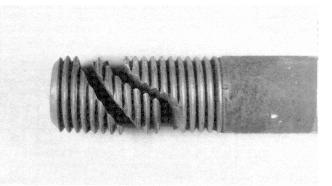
Multi-Fracture Failure of a Two Inch Diameter Cylinder Head Stub.
